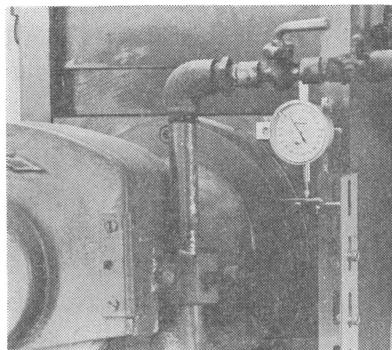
The dial gauge indicating vertical position of grinding wheel.
